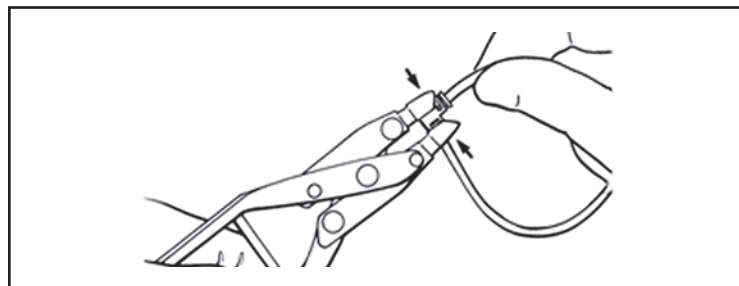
Use the tool twice when using a right-angle connector - once on each connector end
